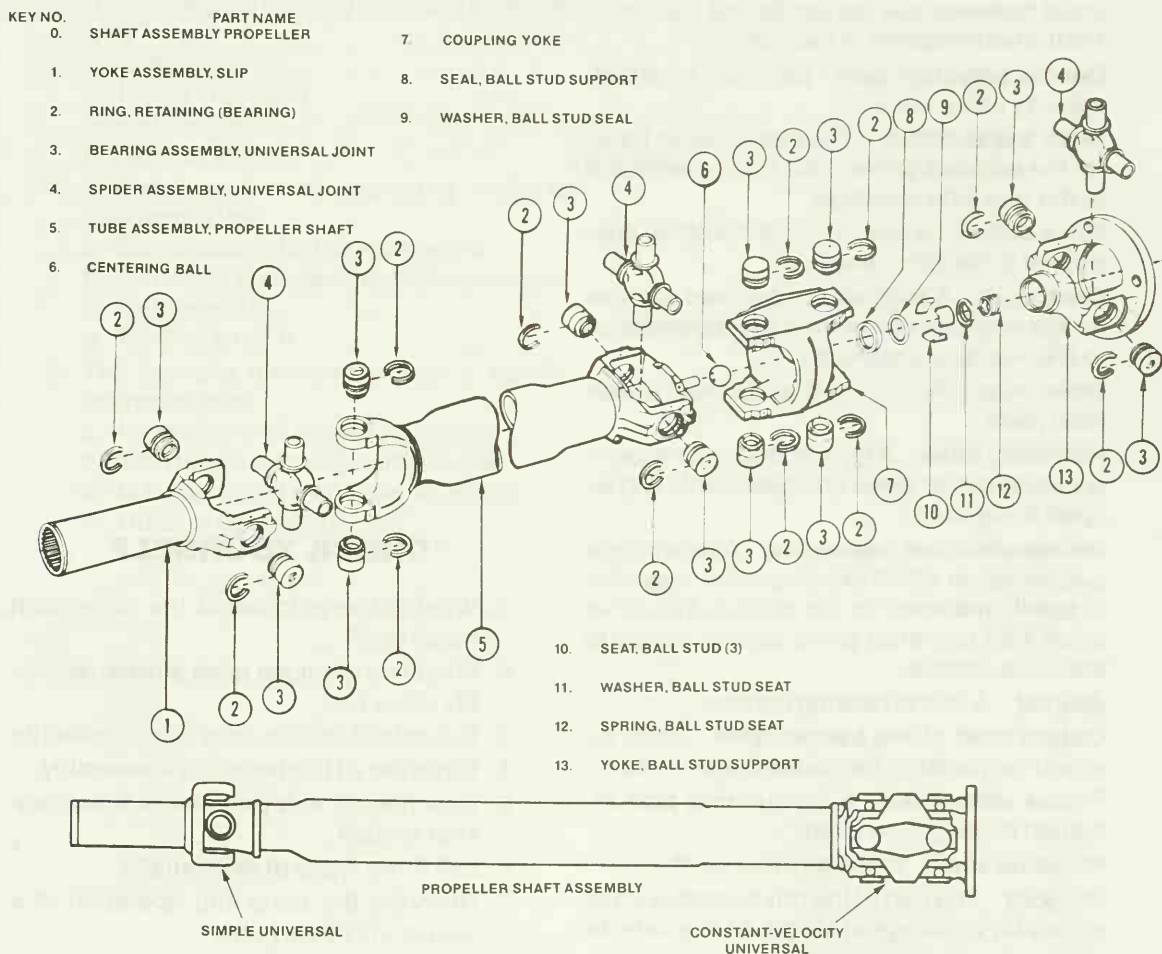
Exploded view of a drive shaft assembly with a simple universal at the front and a constant-velocity joint at the rear. (Cadillac Motor Car Division of General Motors Corporation)
